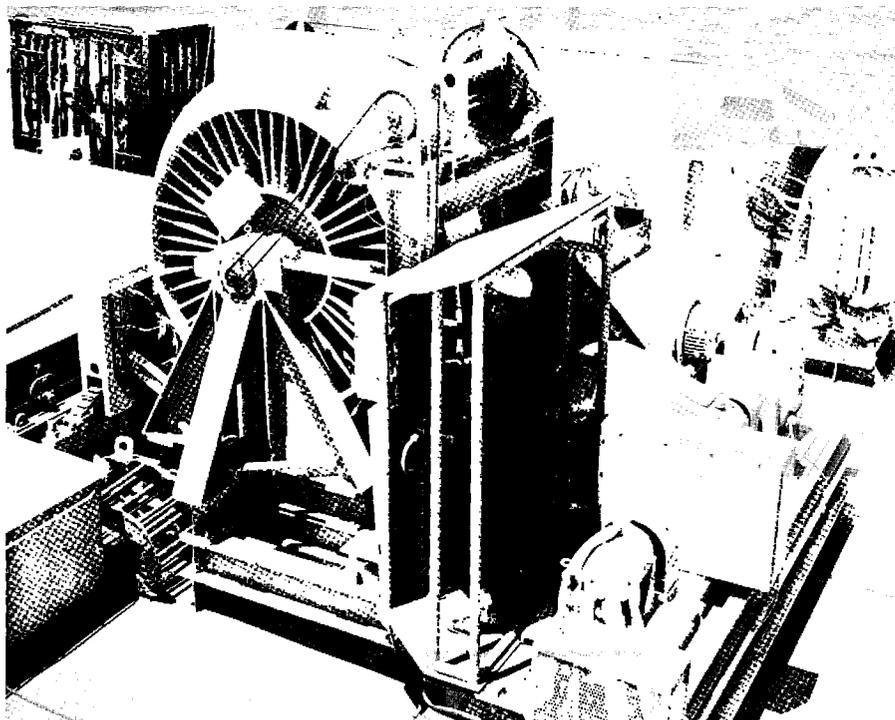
Deep-sea hoist with 22,000 ft of coaxial cable
